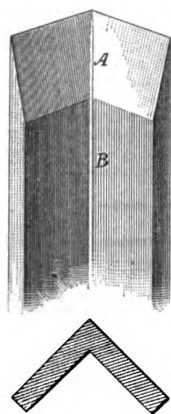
Elevation and Plan View of a Corner or Framing Chisel.
